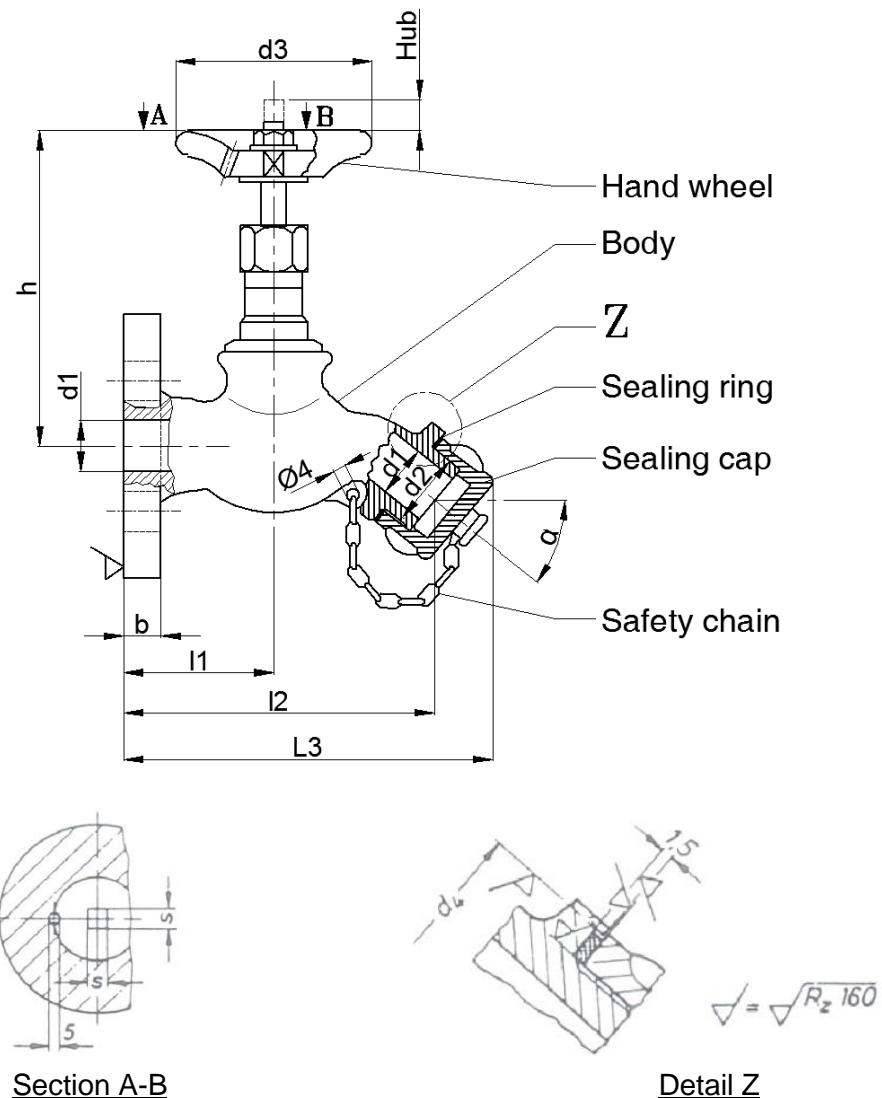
Overall view of copper alloy outlet valve with dimensional parameters
